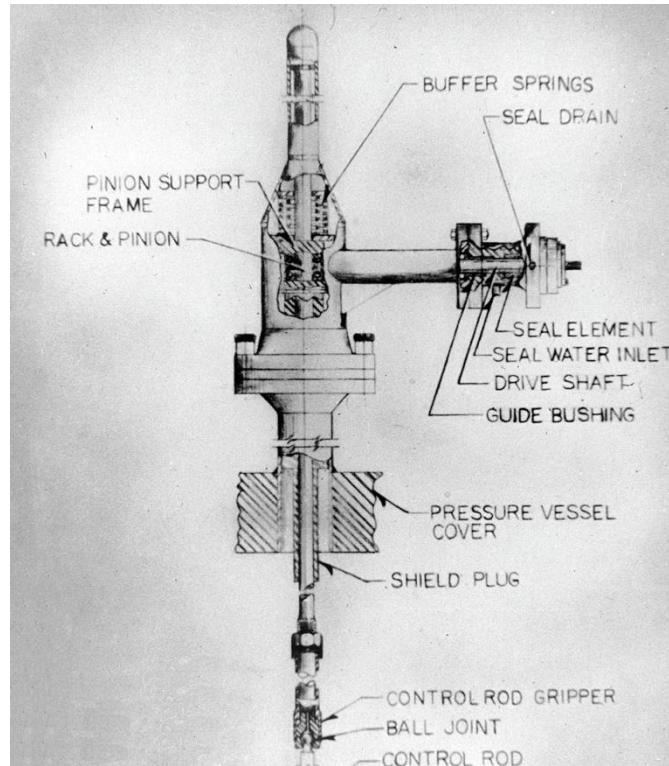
Cruciform control-rod drive mechanism of SL-1 reactor.
